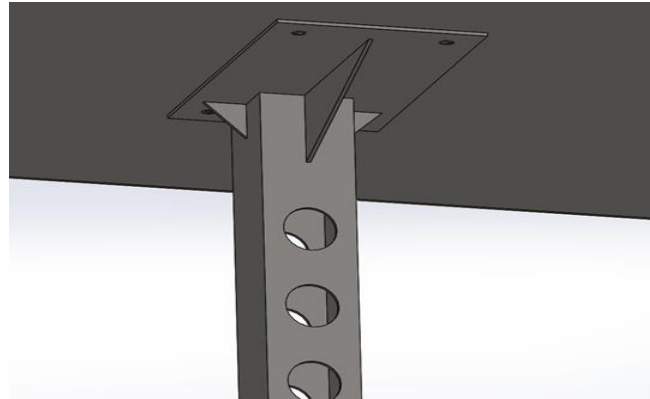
A close-up of the inner stem and three of its five holes, the triangular supports attached to a smaller plate, and the larger plate attached using screws..
